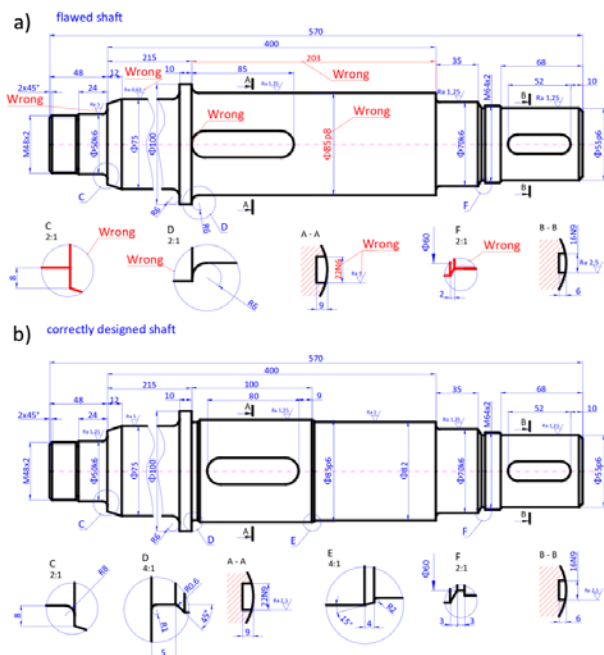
A machine shaft with highlighted errors: a) an antipattern, b) correct design [6]
